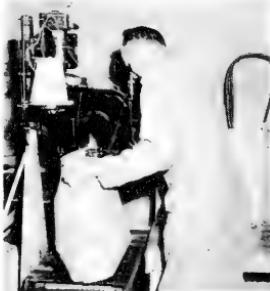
BAG-SEWING MACHINE; THIS MACHINE WILL SEW SEVEN BAGS PER MINUTE.
